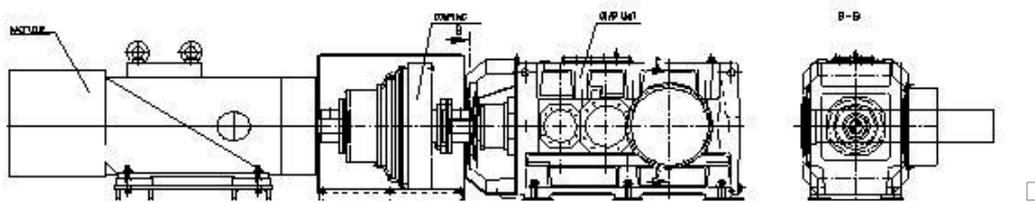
Driving unit (motor, coupling and gear) supported by a steel beam (Rimola, 2010).
